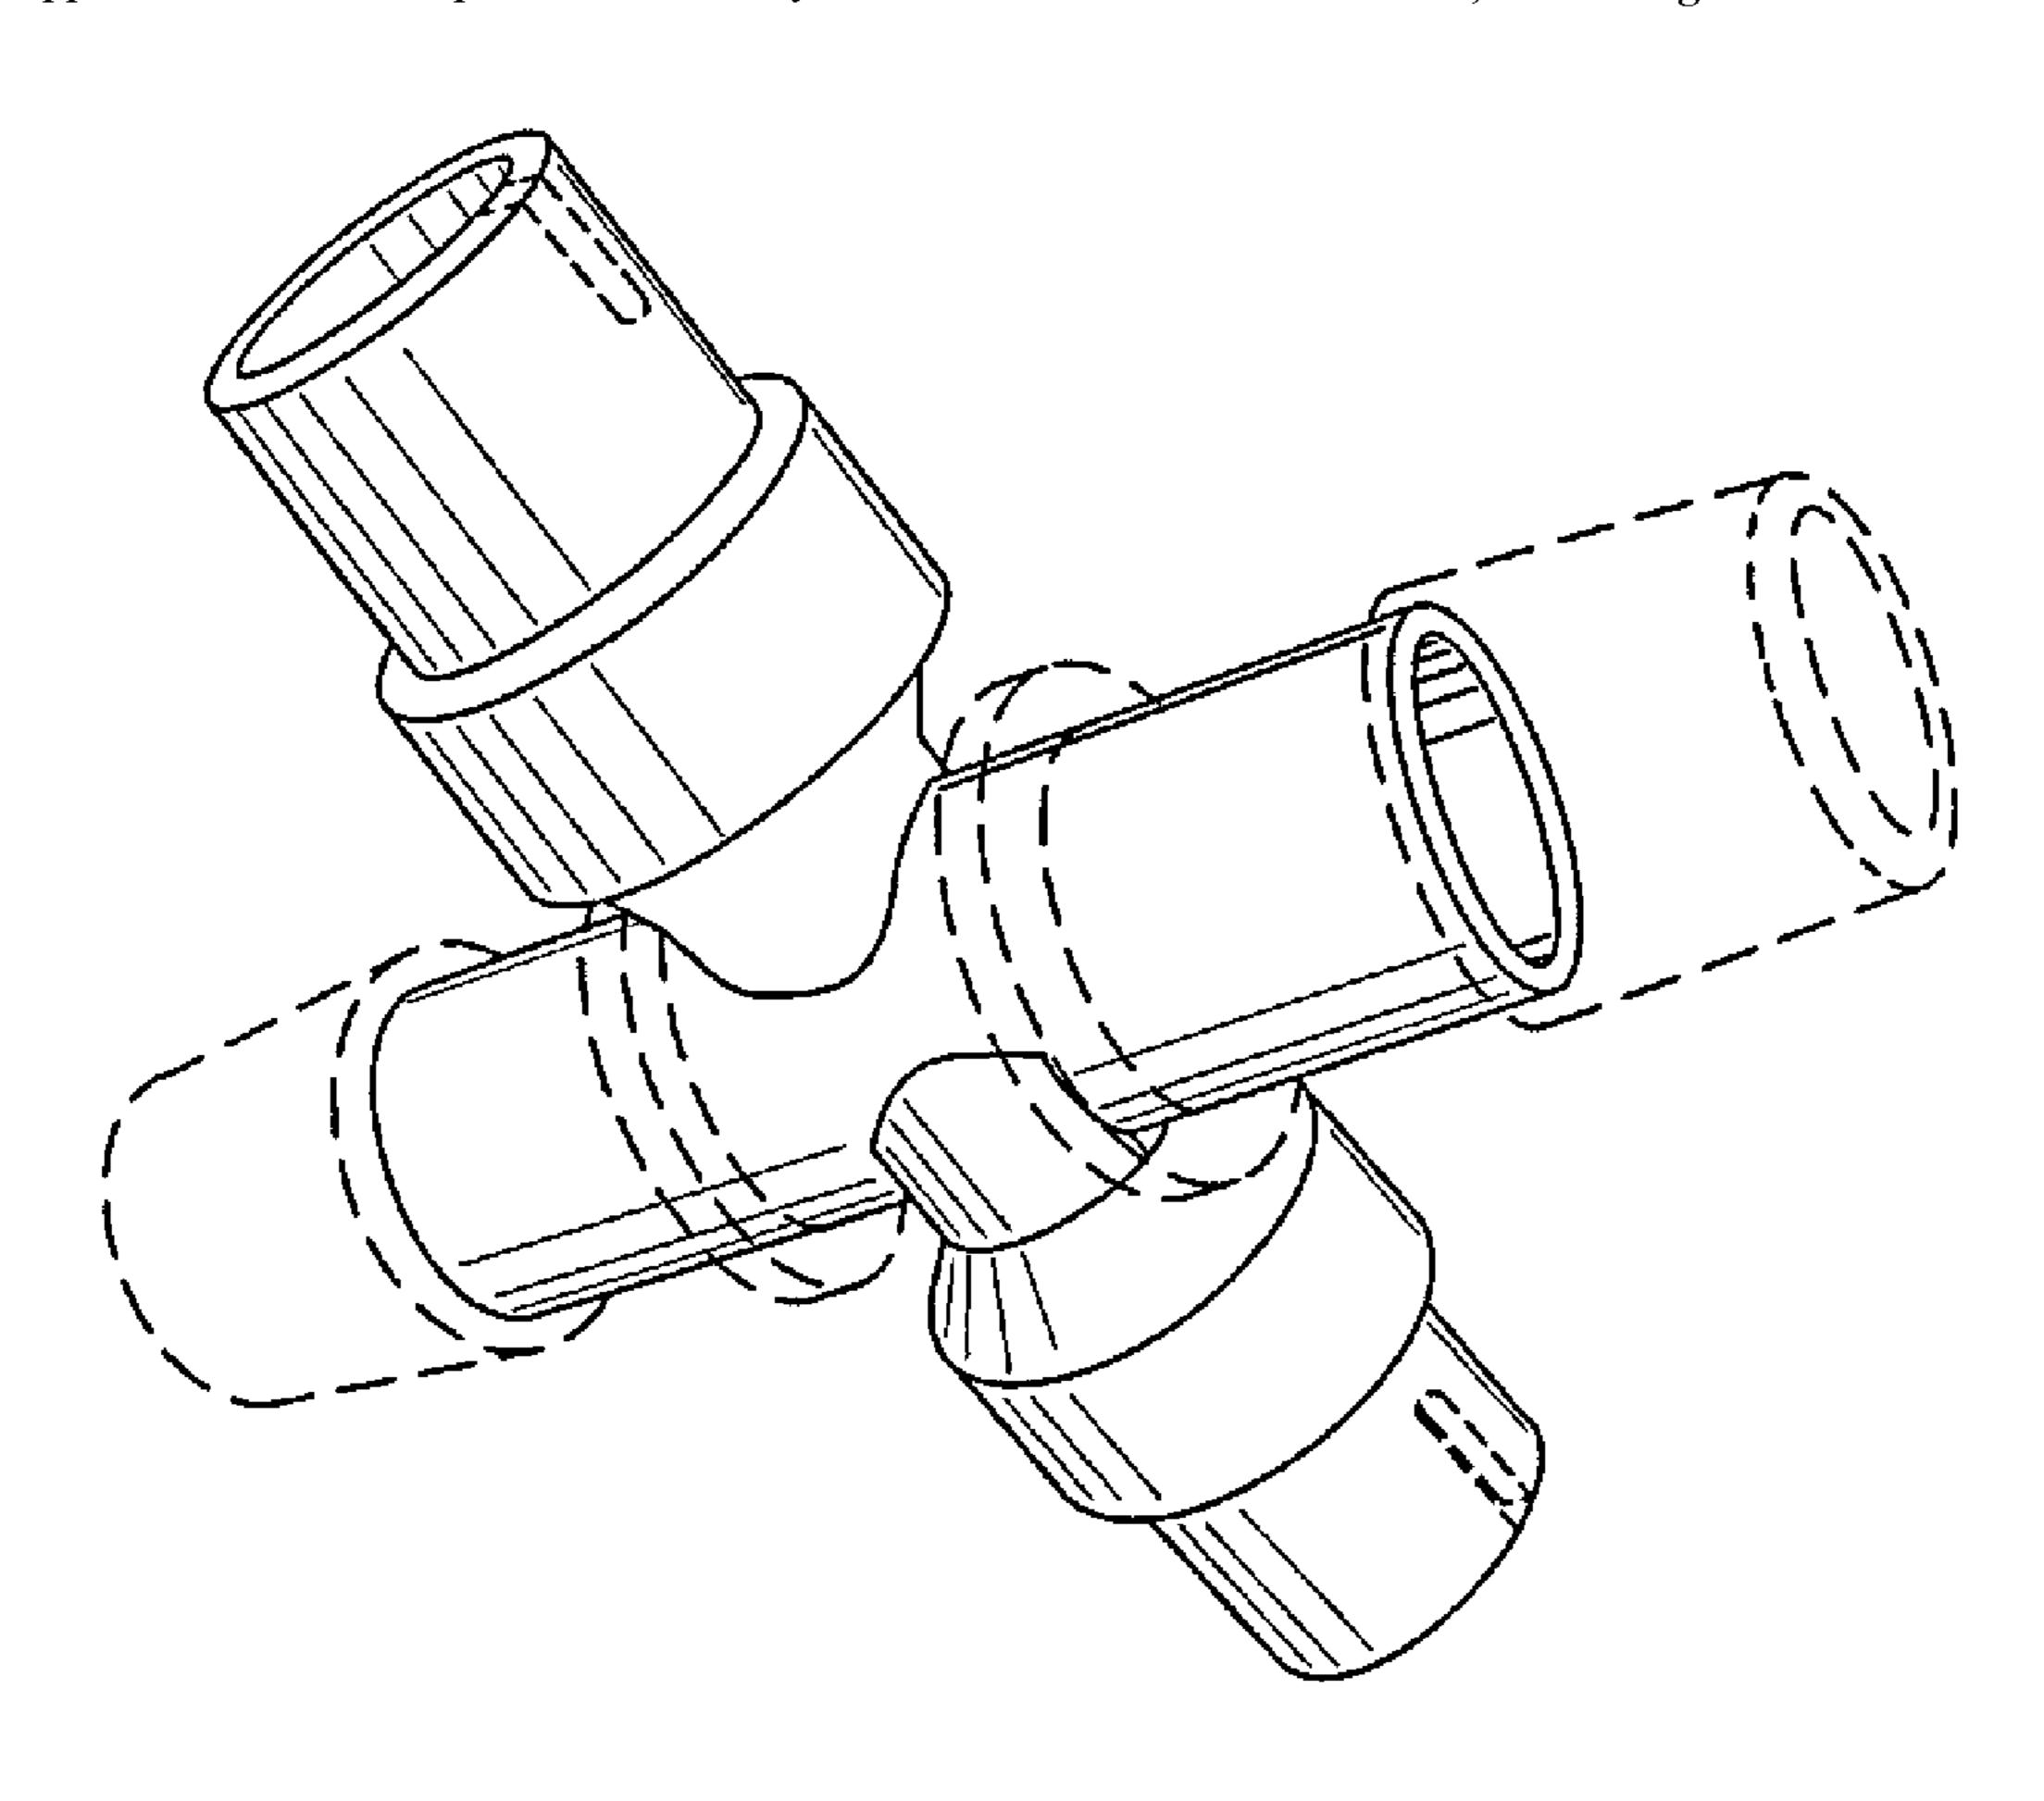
is a top and front perspective view of a sensor fitting showing the new design;
